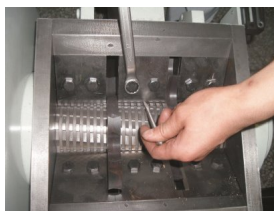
Installation of Fixed Blades and Rotating Blades 1
